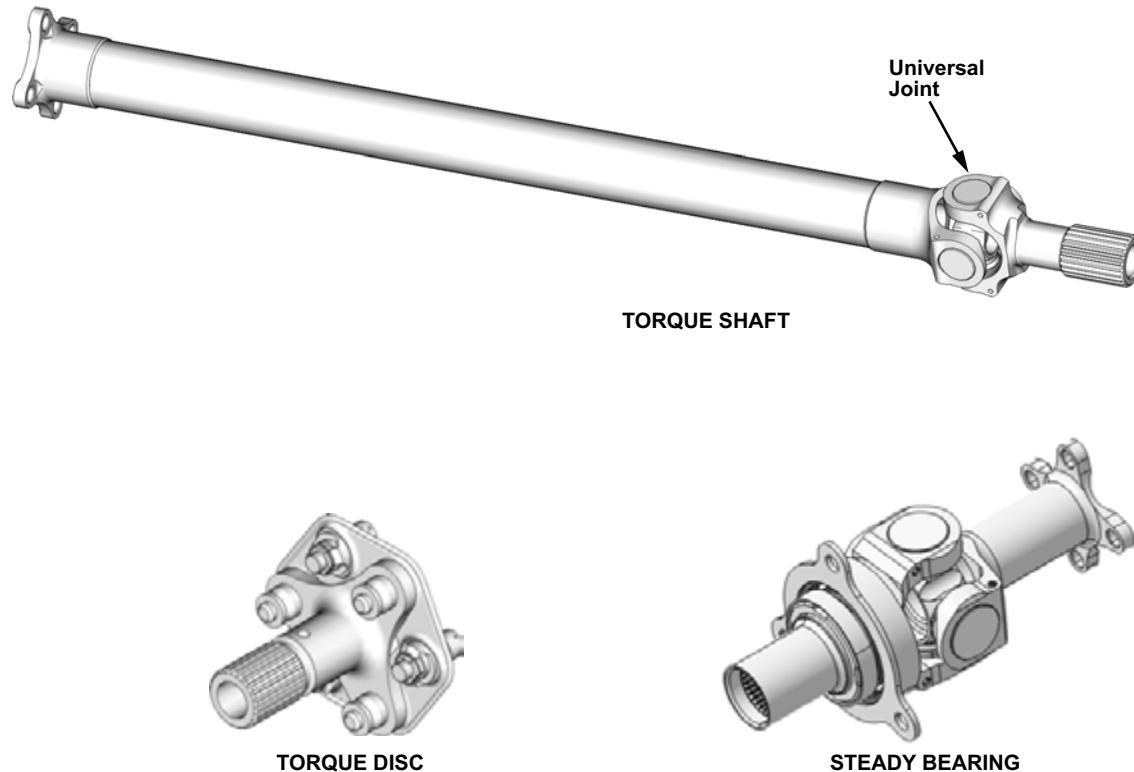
Torque Shaft, Torque Disc, and Steady Bearing
